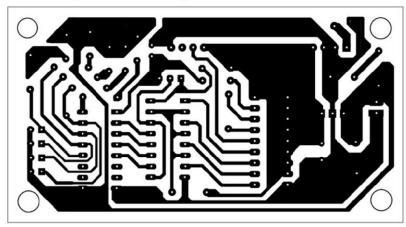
An actual-size, single-side PCB layout of receiver circuit for wireless equipment control
